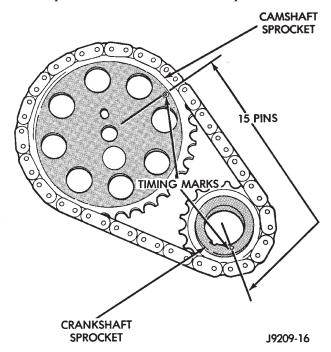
Verify Crankshaft—Camshaft Installation— Typical
